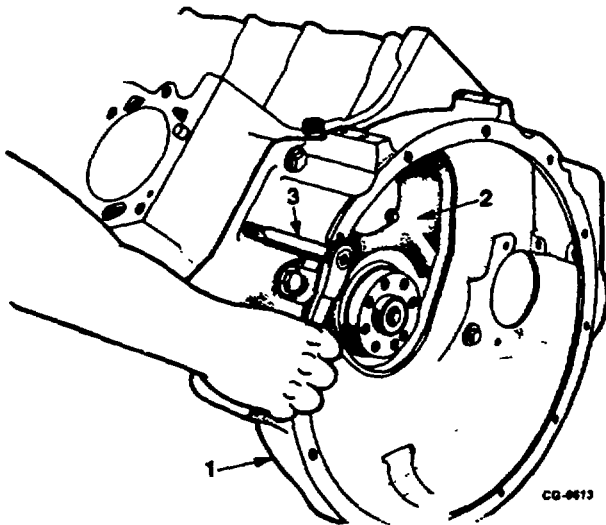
Reaming Flywheel Housing-to-Crankcase Roll Pin Holes
